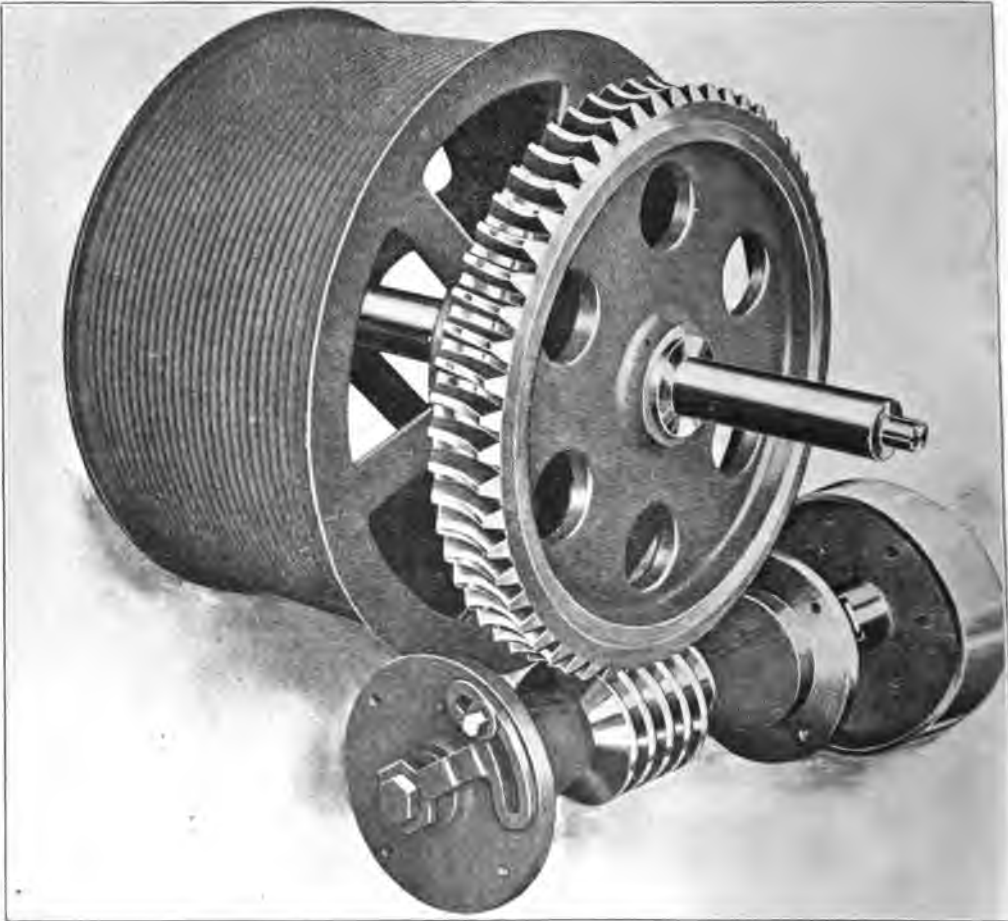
Drum is bolted direct to the gear spider, and the gear is shrunk onto its spider.
